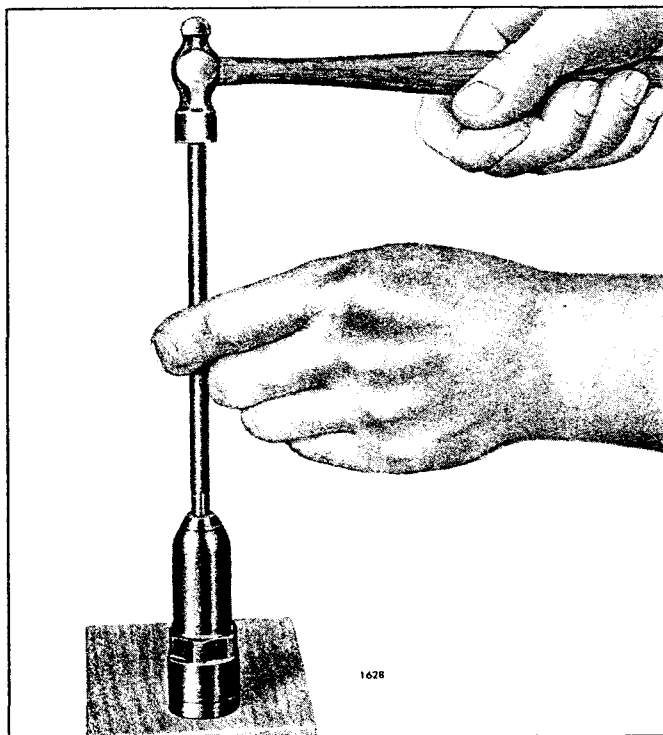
Removing Spray Tip from Injector Nut Using Tool J 1291-02
